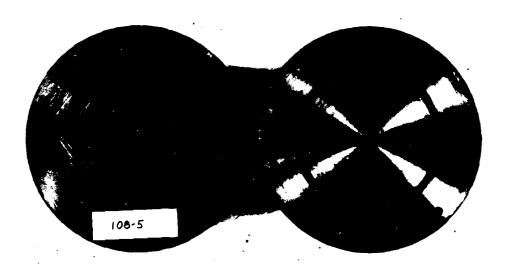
Carbon steel-flat flange test jig with anode after exposure showing corrosion of flange to seal.
